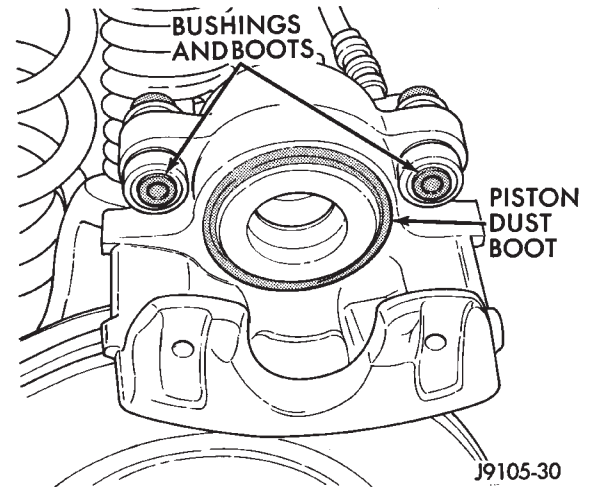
Front Caliper Dust Boot And Bushing Locations
